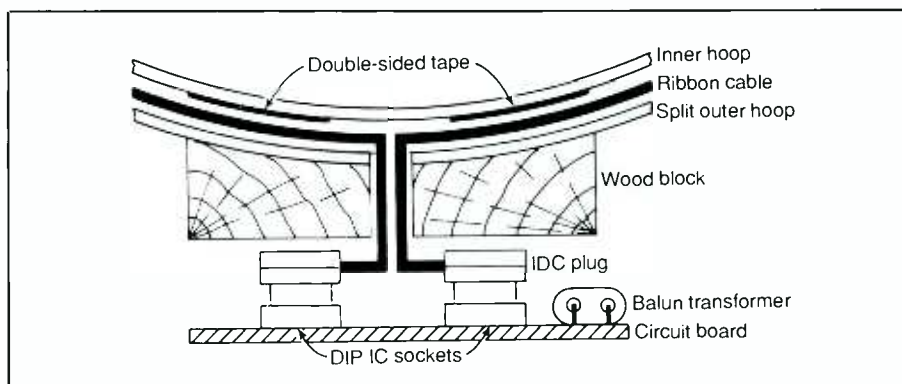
Mechanical assembly details for loop and circuit-board assembly.
